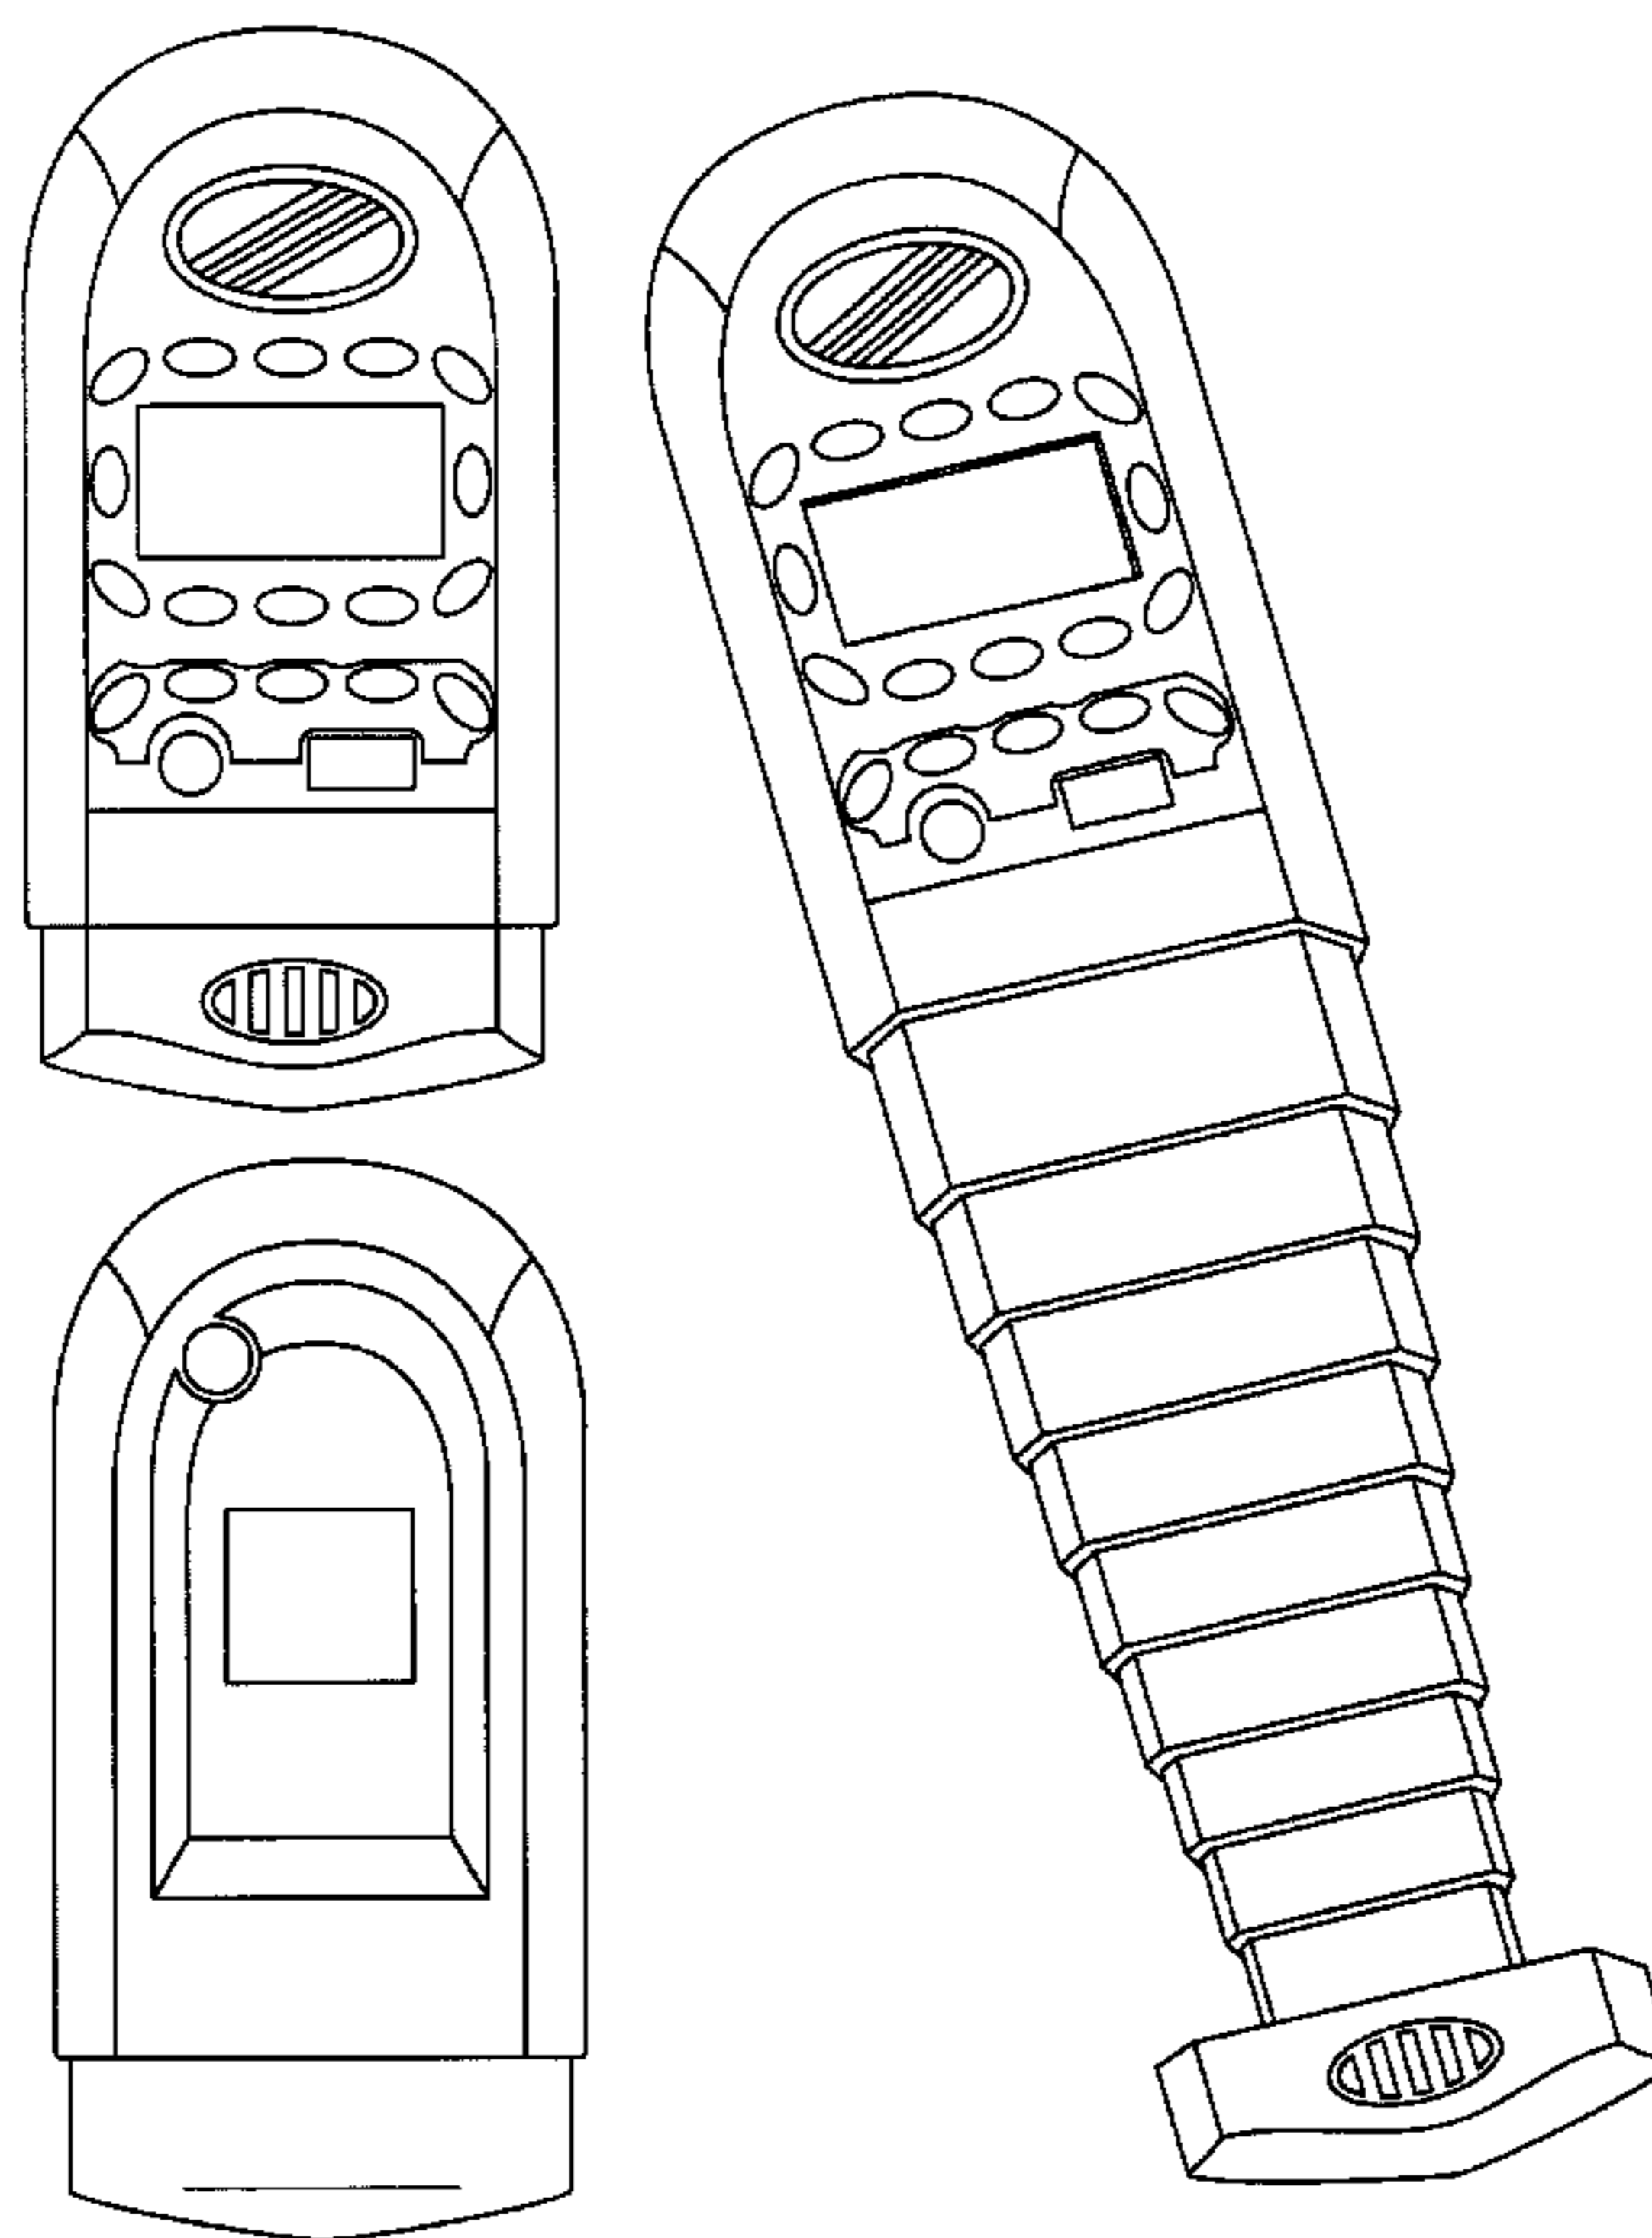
is a bottom view of the cell phone housing showing my new design in the extended position.
